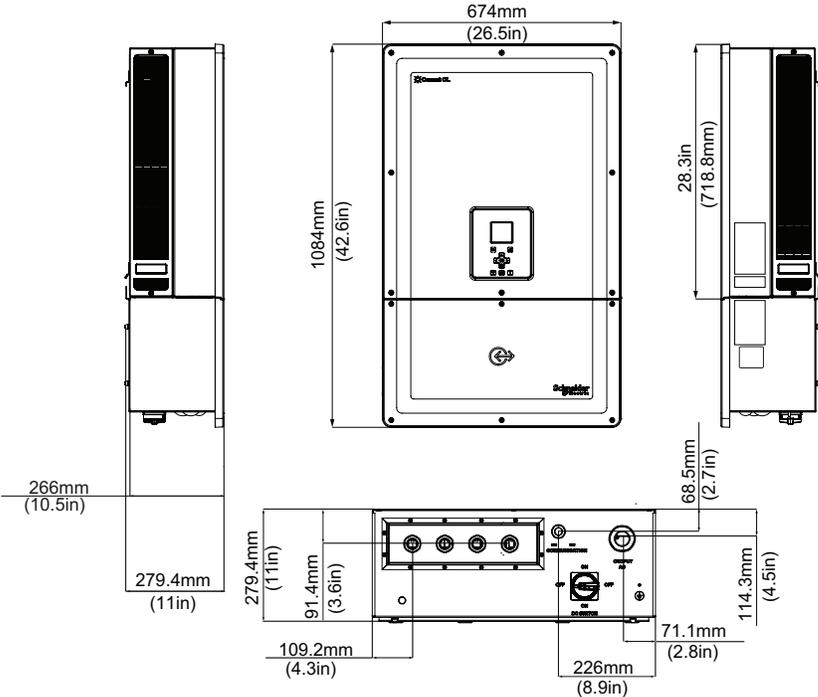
Views and dimensions of the inverter and the wiring box (Essential/Optimum)
